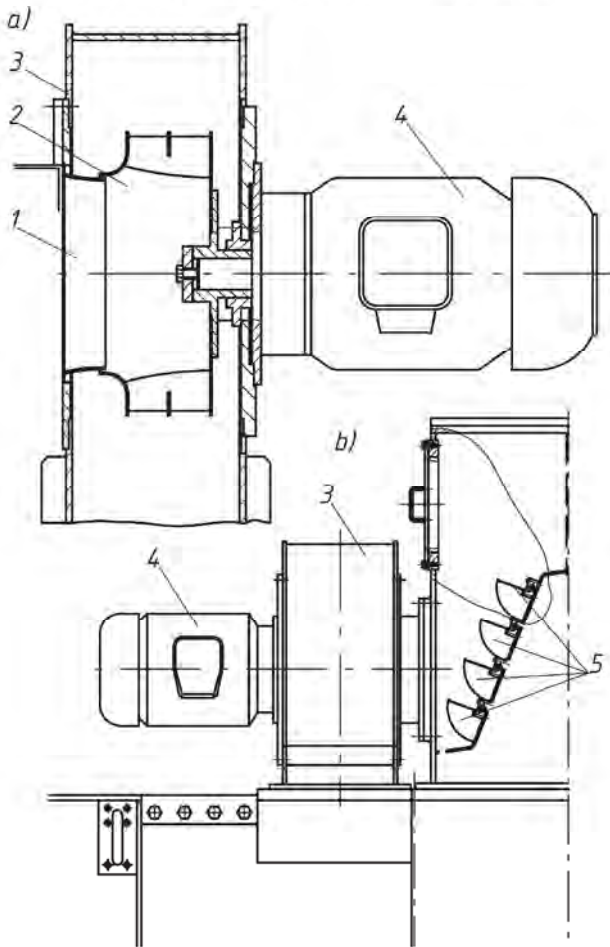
Electric blower (a) and its inclusion in the air supply system of a diesel engine type RTA 72 from Wärtsilä (b): 1 – inlet deflector; 2 – rotor; 3 – housing; 4 – electric motor; 5 – check valves (adapted from [11])
